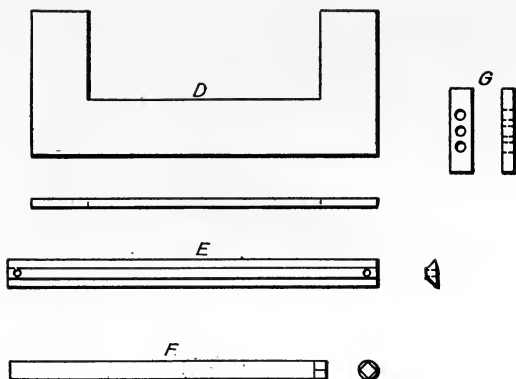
CASTING DETAILS FOR SETTING KETTLE
